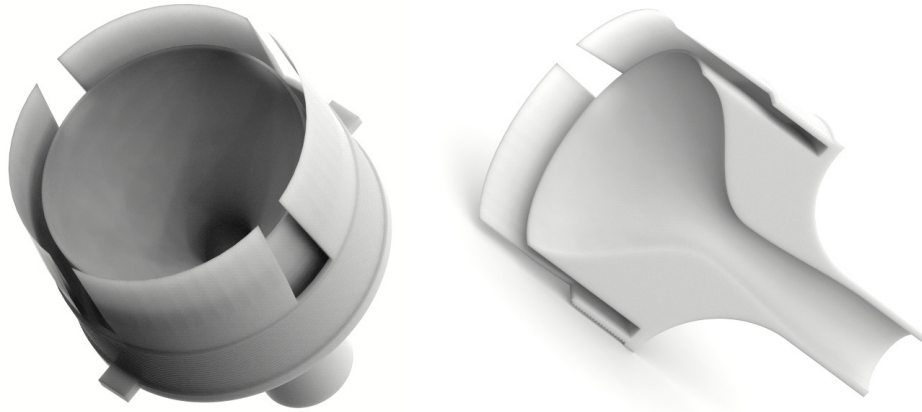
Left: Convergent divergent nozzle with threading. Right: Section view of the convergent-divergent nozzle.
